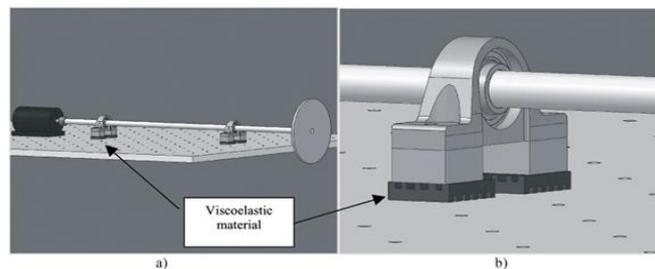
a/b- Rotor System and Roller Bearing with Viscoelastic Layers.
